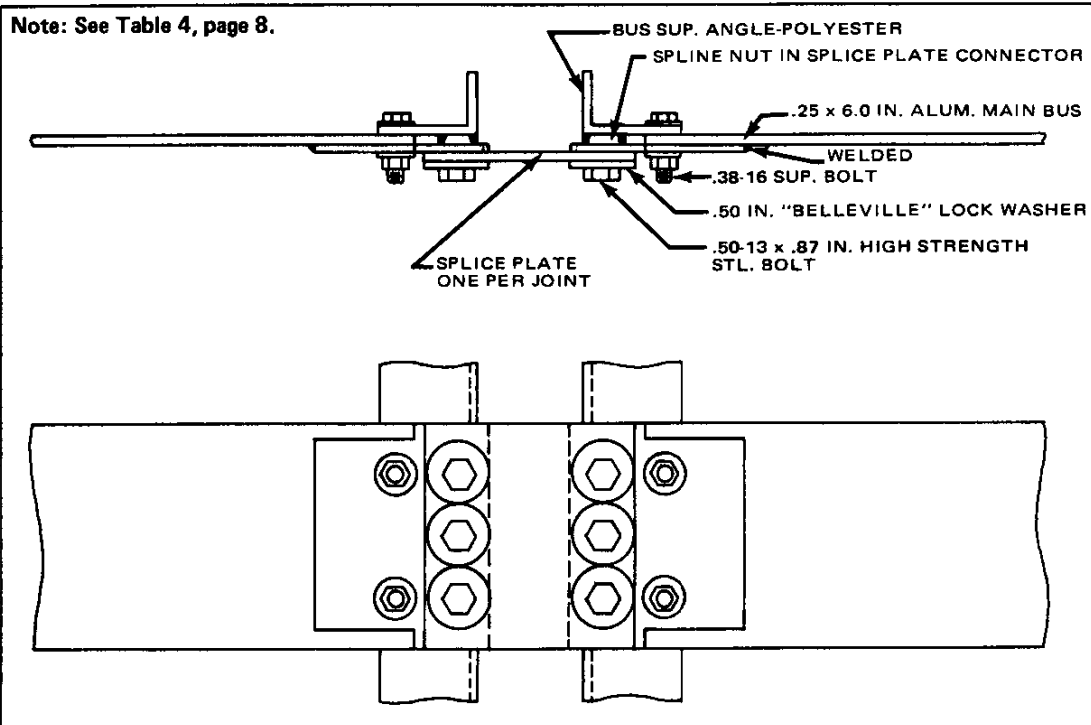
Field Assembly of Joints in 1600 Amp Aluminum Horizontal Bus
